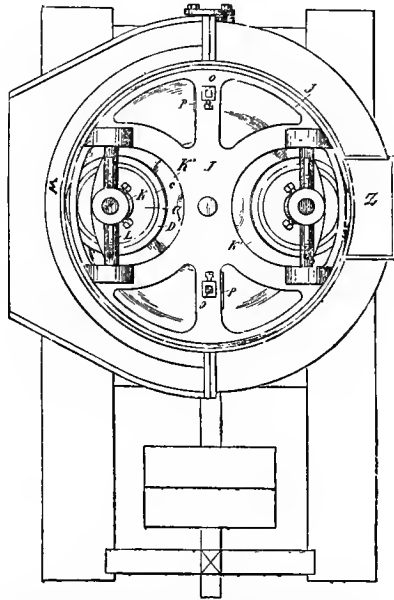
HUNTINGTON MILLING MACHINE. Plan.
